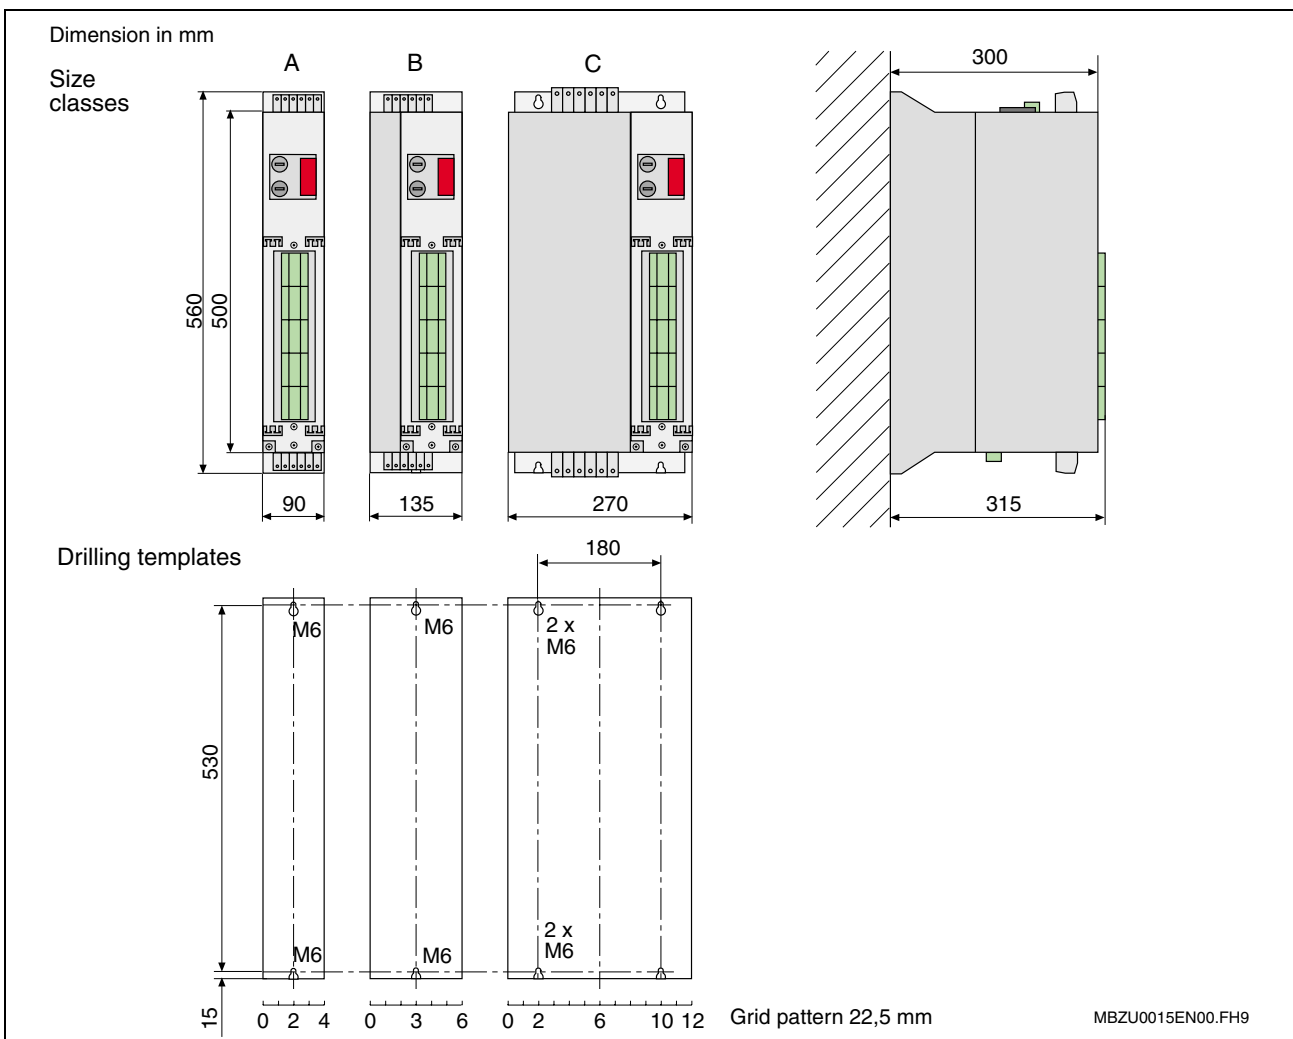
Dimension Drawing Chemistry module size classes A, B and C
